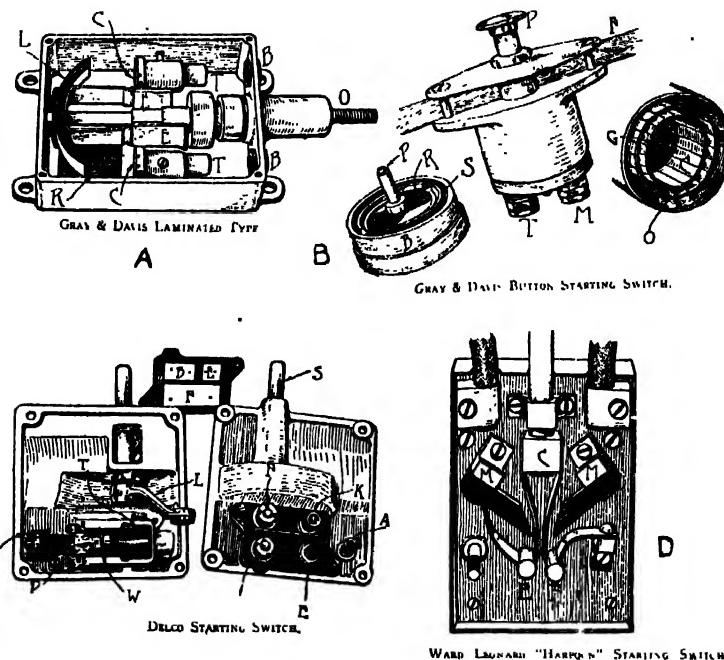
Showing Construction of Typical Motor Starting Switches.
